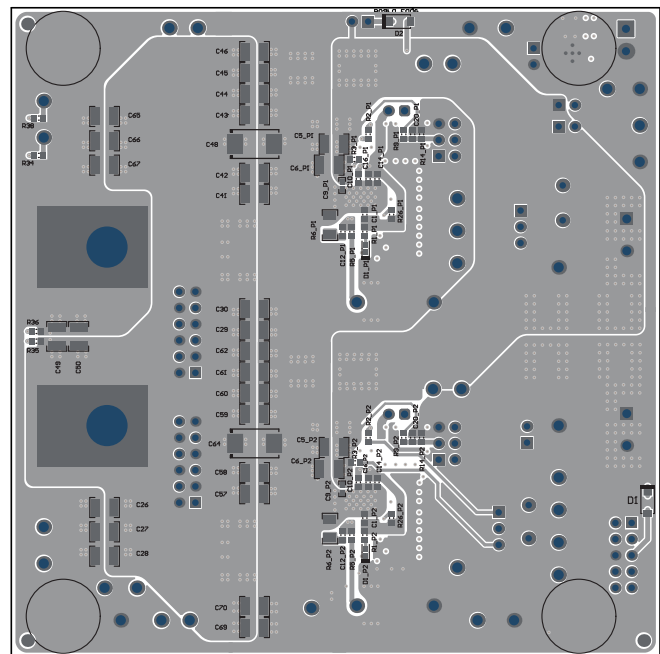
TPS546D24AEVM-2PH Bottom Side Component View (Bottom View)
